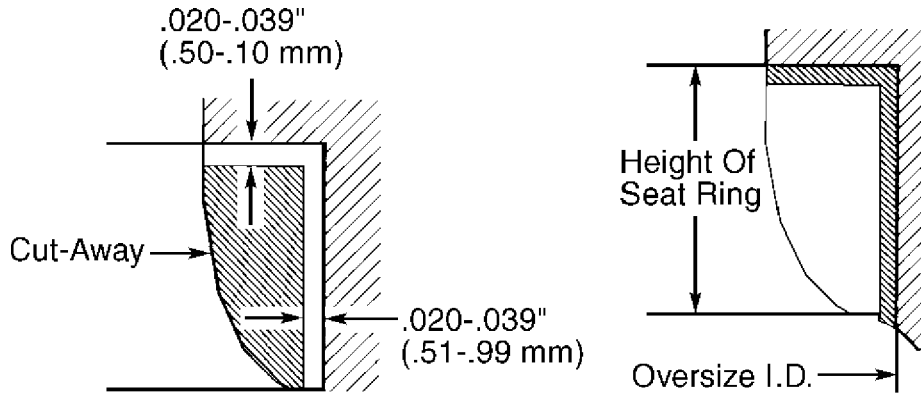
Cutting Valve Seat & Measuring Installed Height
